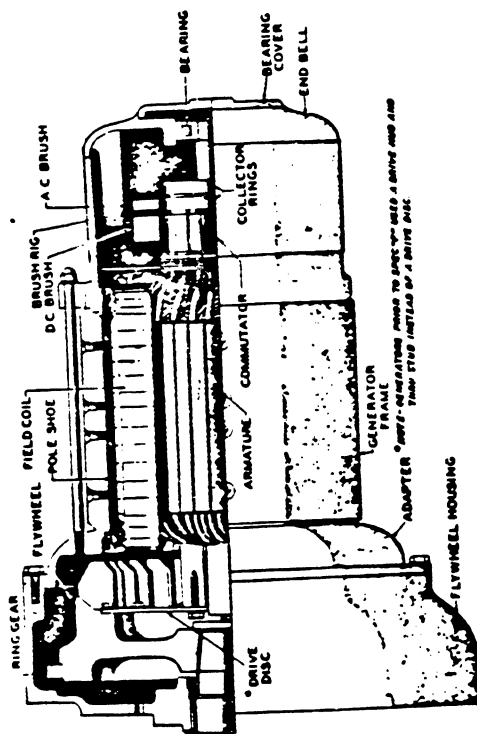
CUTAWAY VIEW OF GENERATOR
